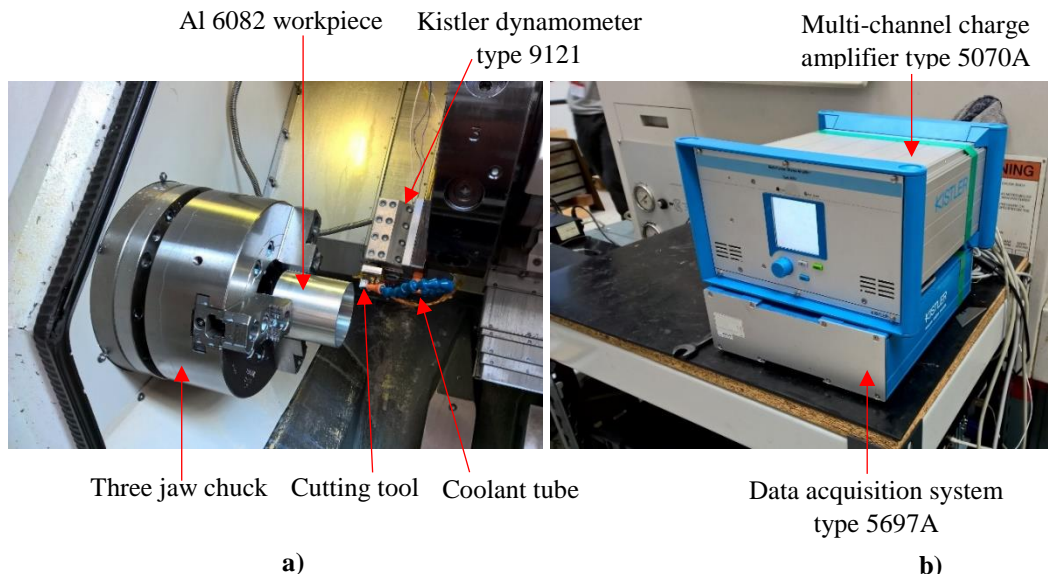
a) Workpiece and dynamometer setup inside the CNC machine, b) Kistler data acquisition and amplifier
